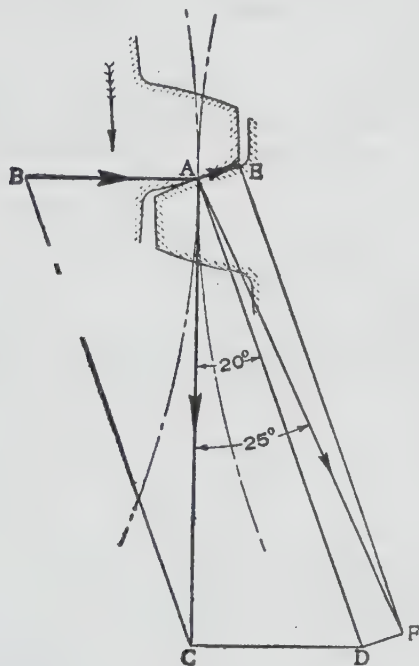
COMPOSITION OF GEAR TOOTH REACTION.
